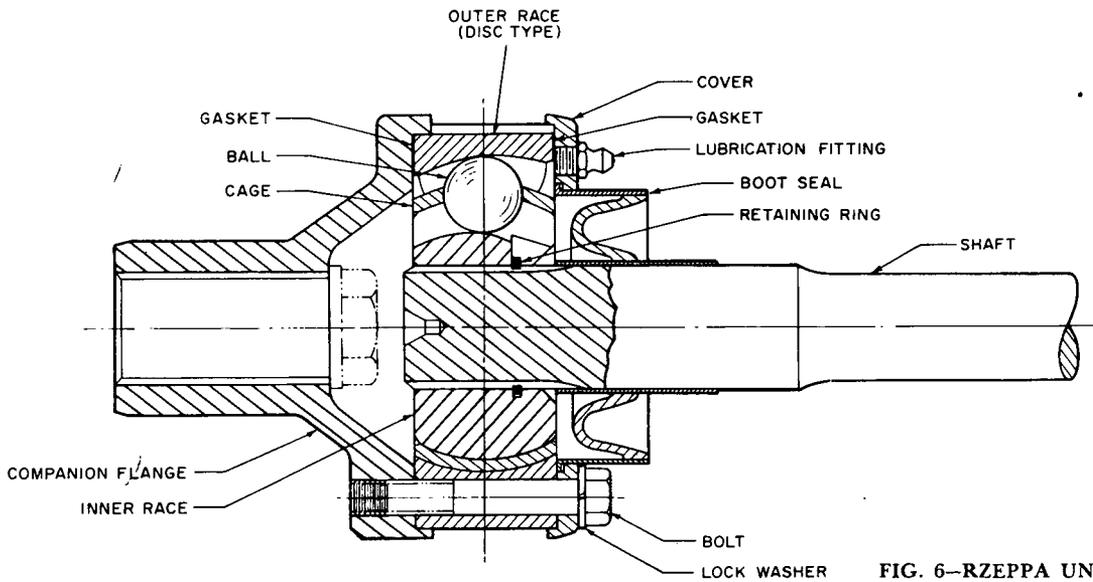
RZEPPA UNIVERSAL JOINT (DISC TYPE)
